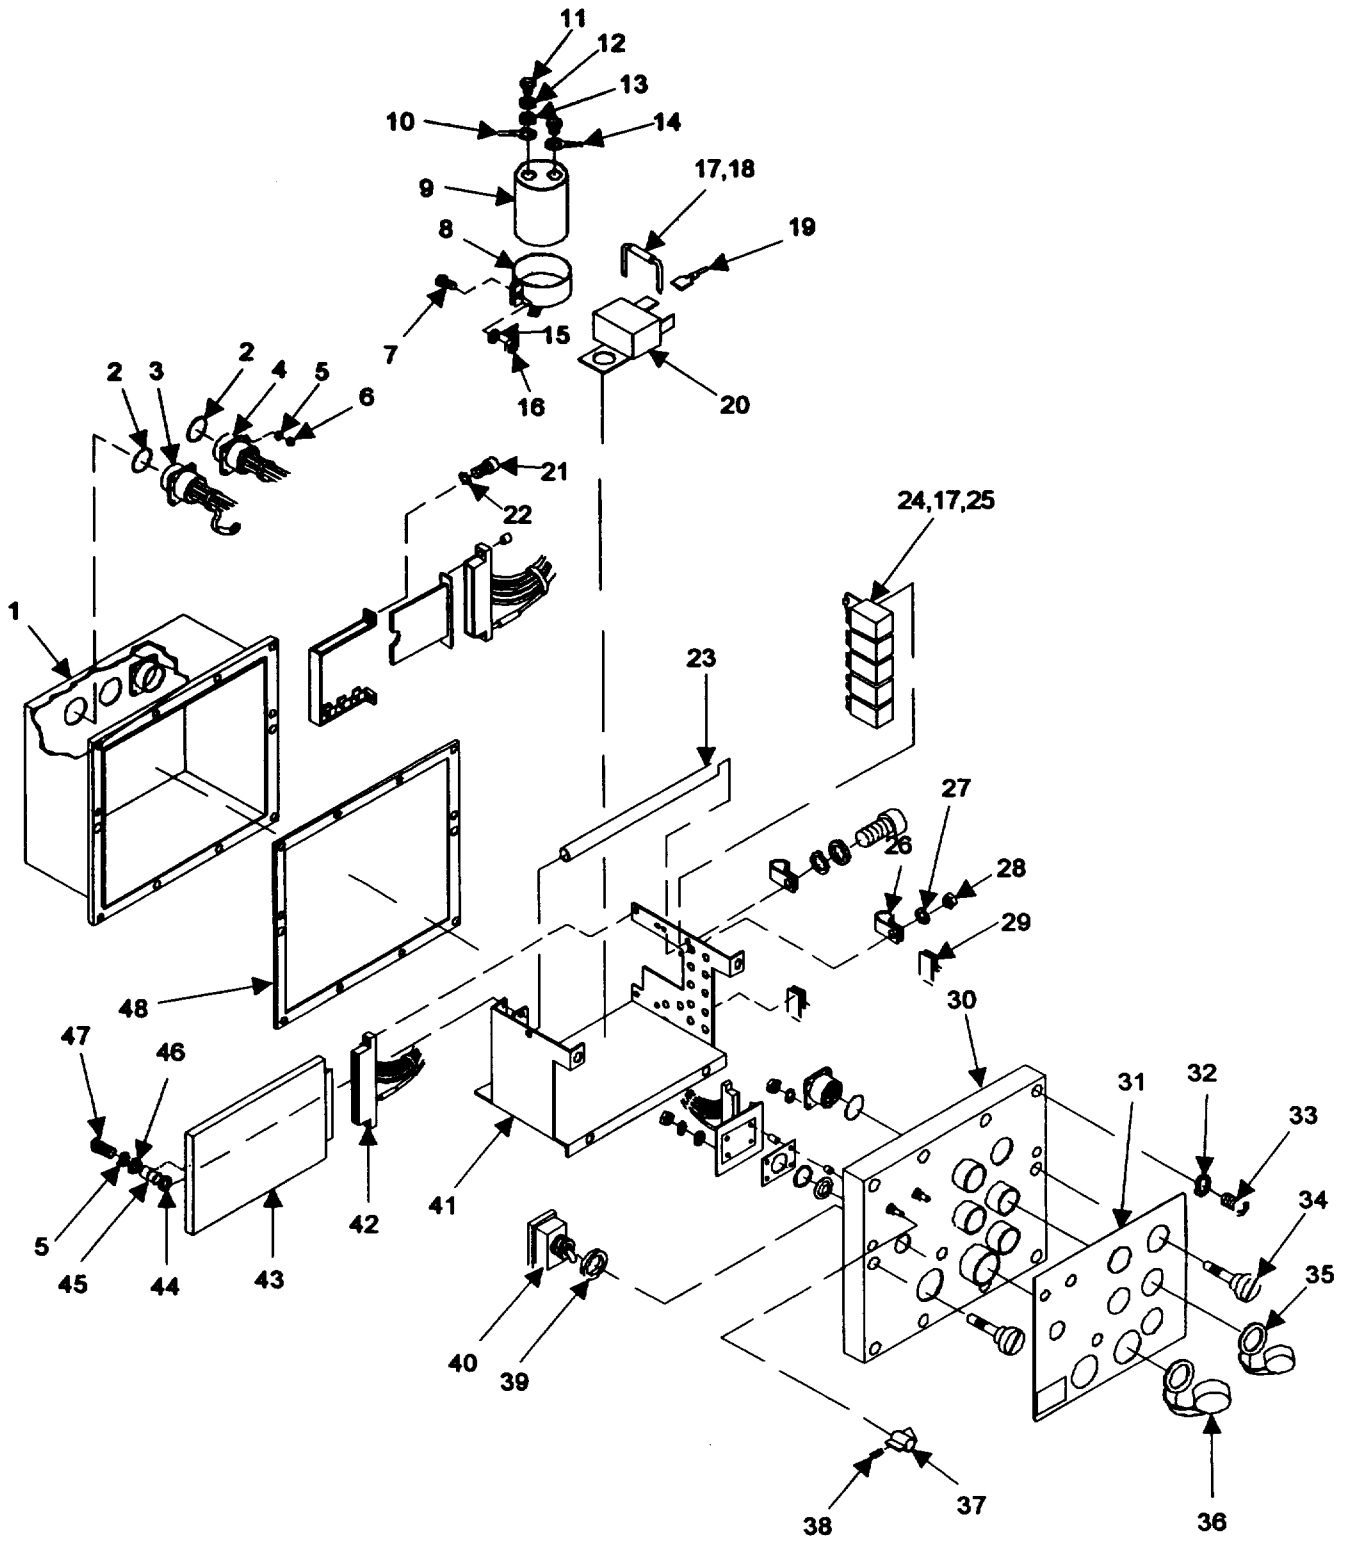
Control Assembly 11784504 (Sheet 1 of 3)
